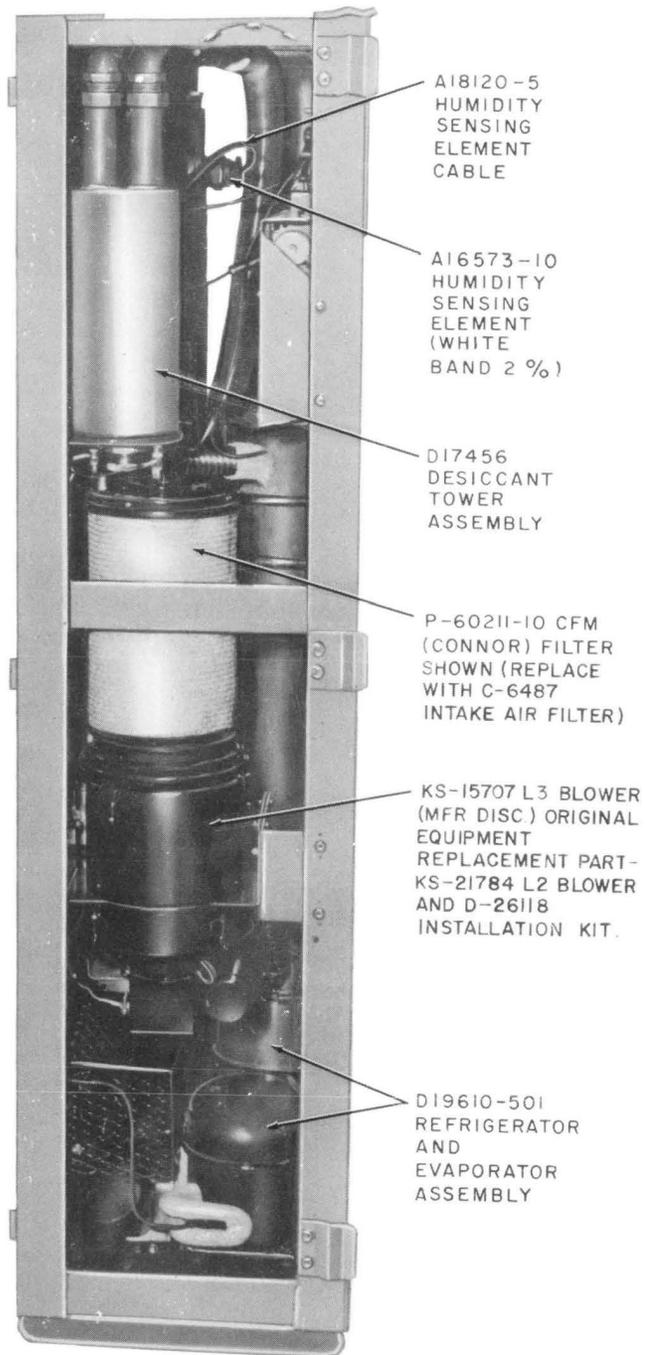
Fig. 3—KS-20183 L1 Air Dryer—Left Side View—Cover Removed
